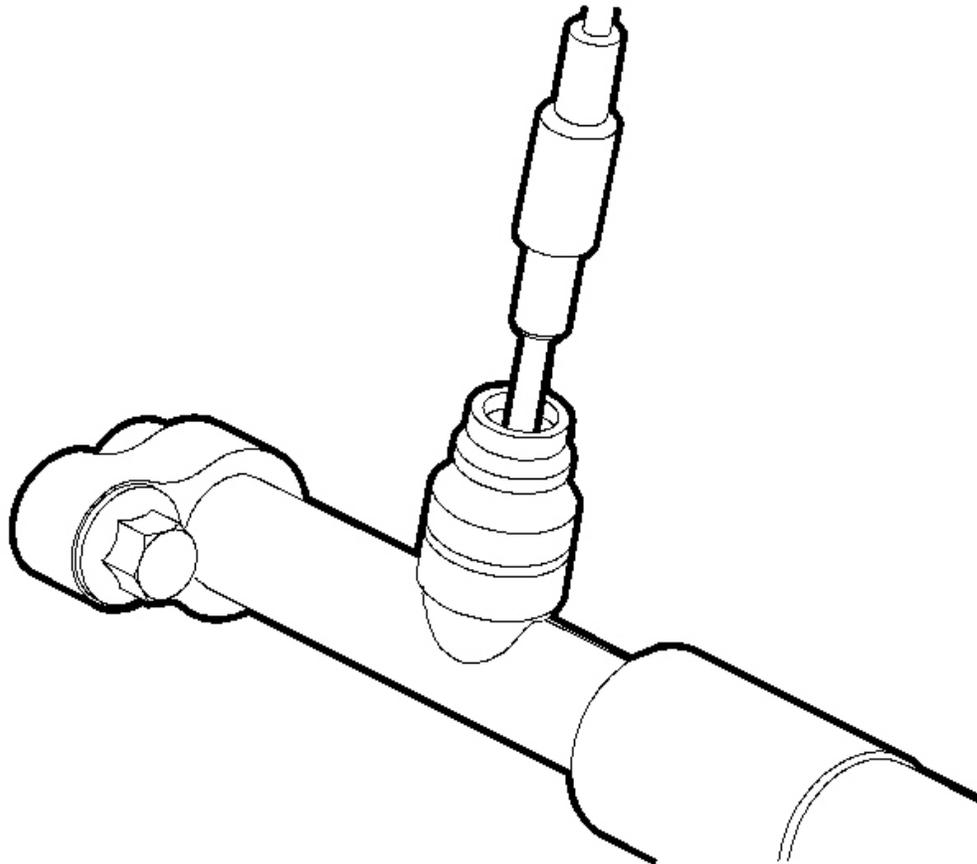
Identifying Special Tools - J 46246 & Valve Core
